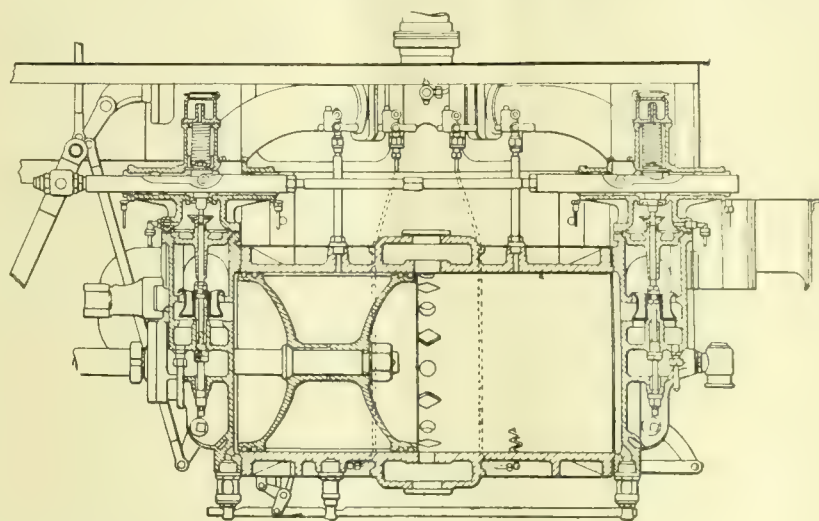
CROSS-SECTION OF CYLINDER SHOWING APPLICATION OF STUMPF VALVE GEAR.
